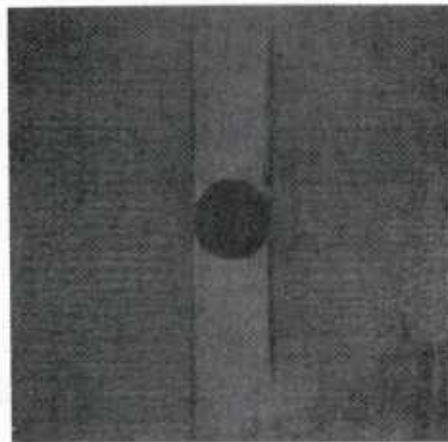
Cracking in 90° Plies Can Cause Fatigue Cracks in 0° Plies in 0/90 Boron/Aluminum
